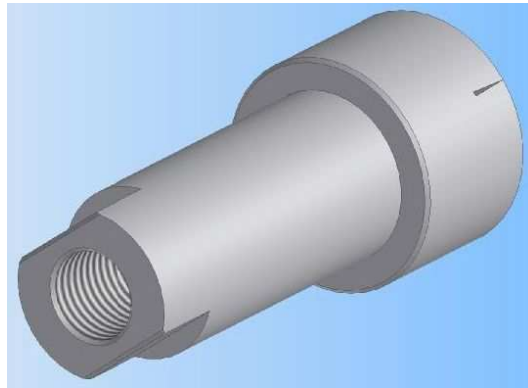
Technical 3D drawing of the HPWR cap.
